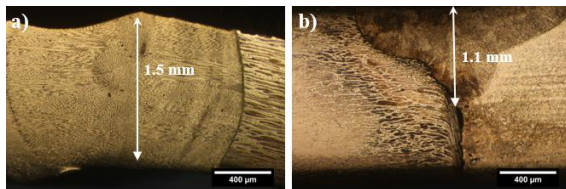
The melt pool depth at laser power of 450 W and focal distance of 0mm and welding speed of a)200mm/min, b)400mm/min.
